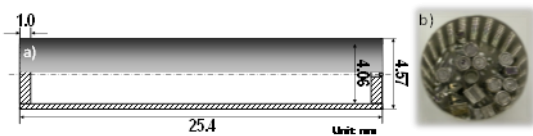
a) Geometry of the PCT specimen, b) PCT specimens inside RB-15J specimen holder basket.
